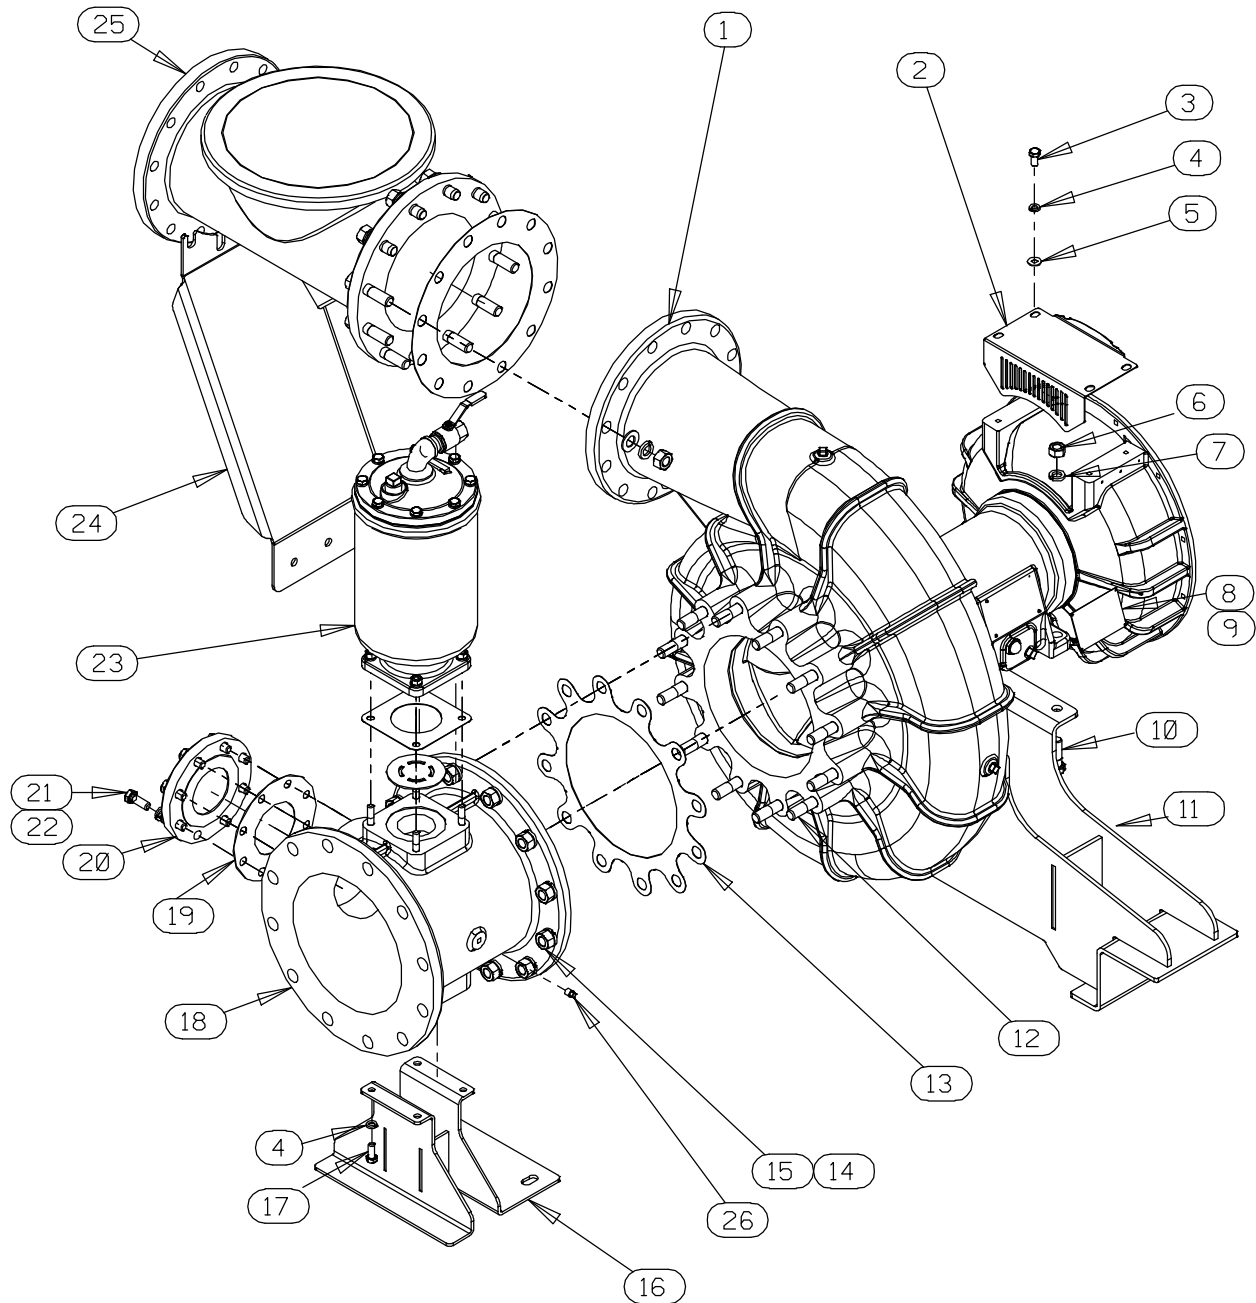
PAH10B60—(SAE 1/14) Pump End Assembly
